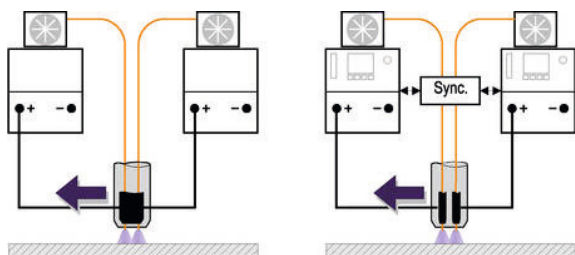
Schematic presentation of double-wire welding (left) and tandem welding (right).
